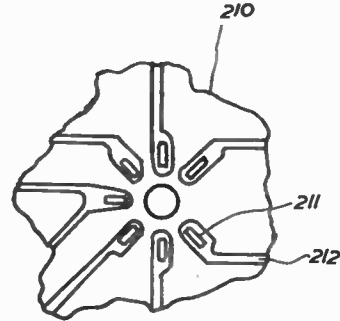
Slots are moulded into a plate to form base for a valve-holder in expandable equipment.
